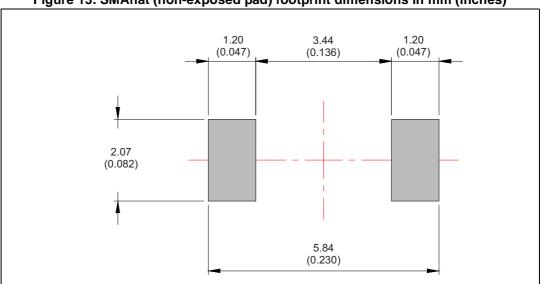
SMAflat (non-exposed pad) footprint dimensions in mm (inches)
